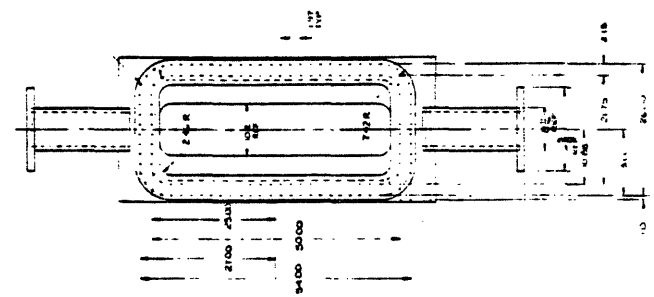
Two Port Vacuum Chamber Weldment.
